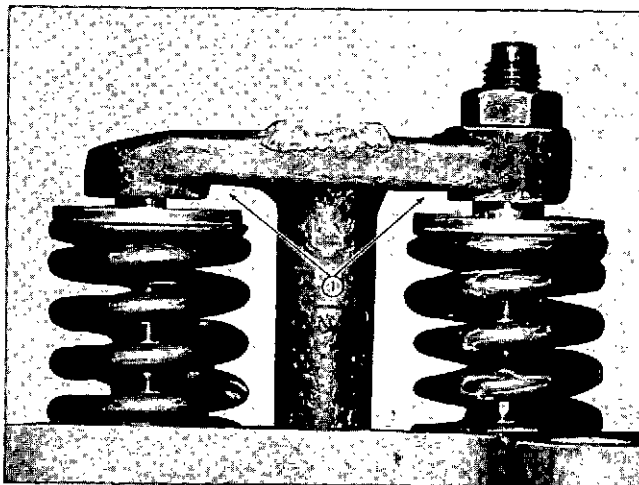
, V414208. Crosshead to valve spring retainer clearance
